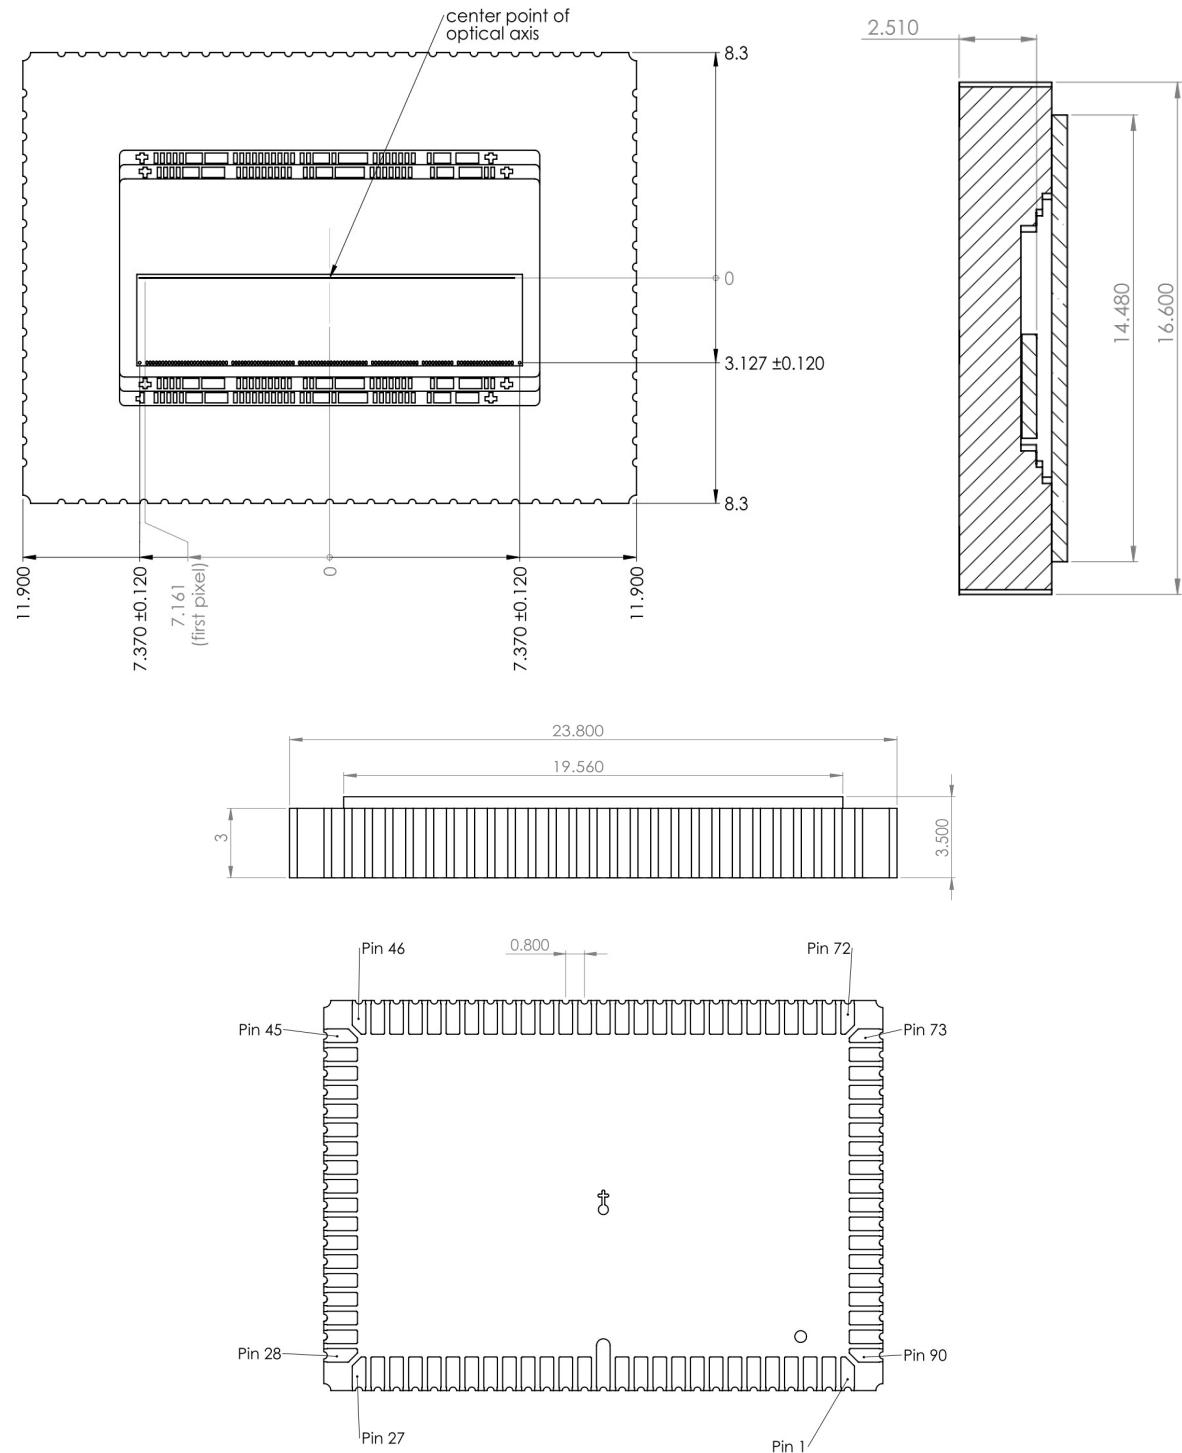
Four Views of LCC Package Drawings for DR2k-7
